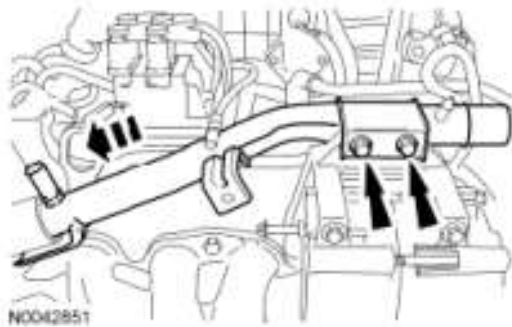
Locating Front Coolant Outlet Pipe Bolts
